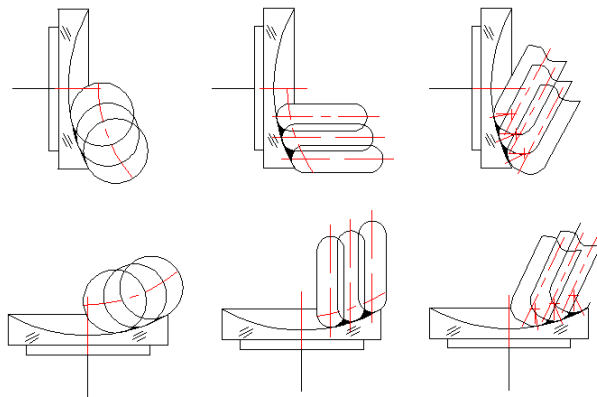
Position of workpiece and grinding wheel when machining concave aspheric surface
